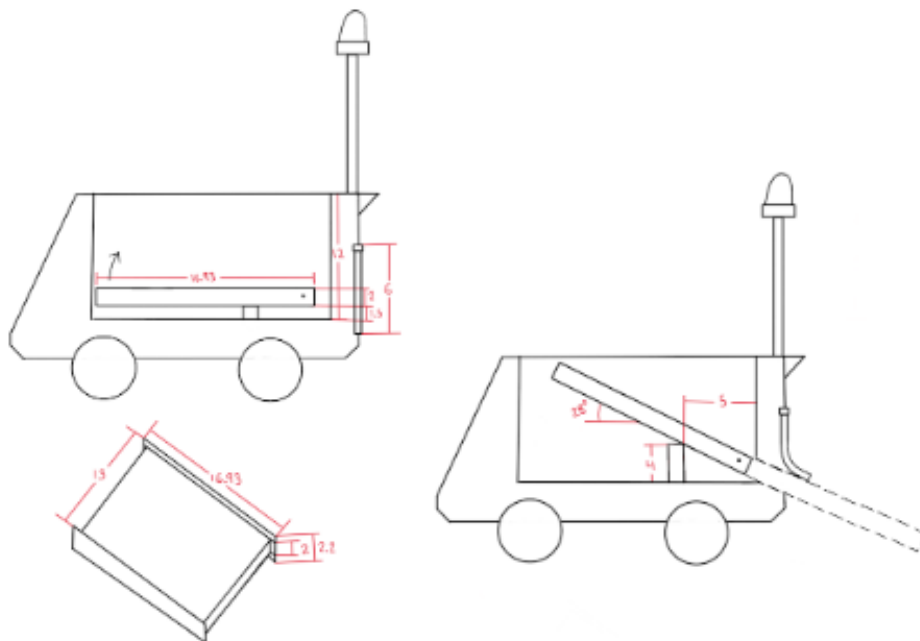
Side drawings of Geoffrey and bottom platform with railings. All dimensions are in inches.
